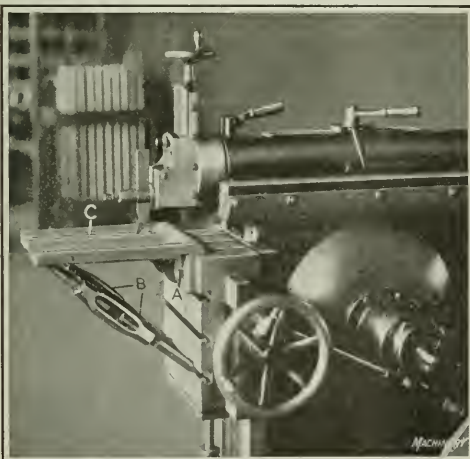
Method of setting up Shaper Table Support for performing a Short Planing Operation on the Shaper
